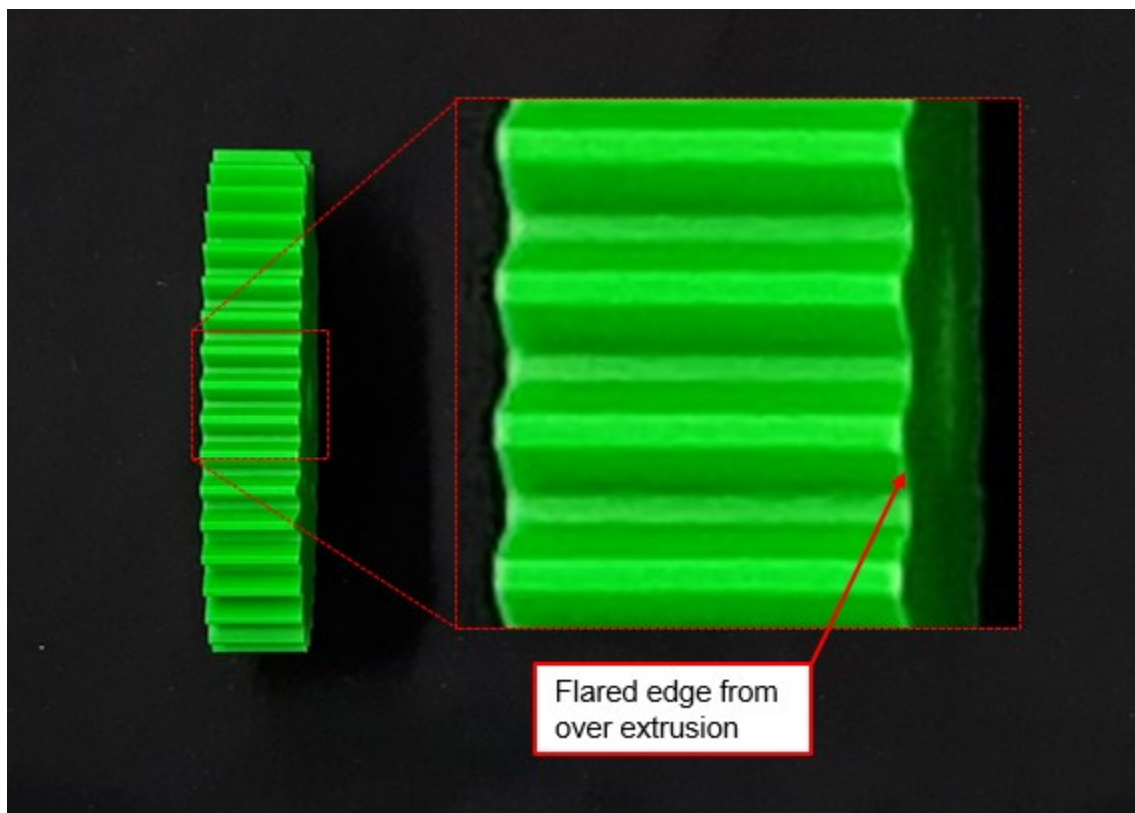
Early 3D printed oval gear showing straight profile design and a detail view of the flared edge resulting from printing over extrusion
